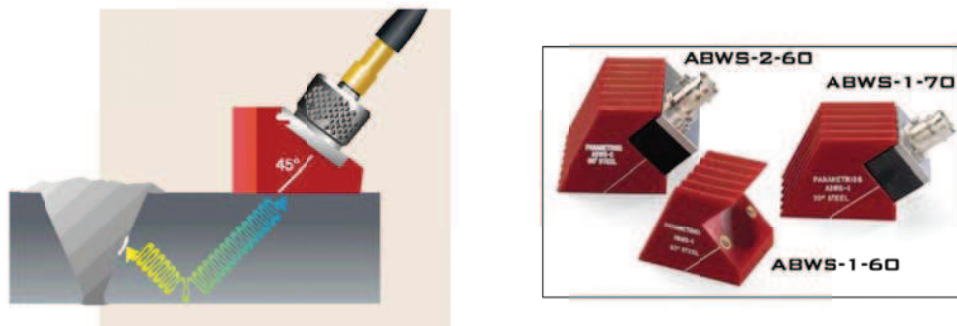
Typical operation condition (welding inspection) with an angled transducer (left) and different types of angled transducers (right). [31]
